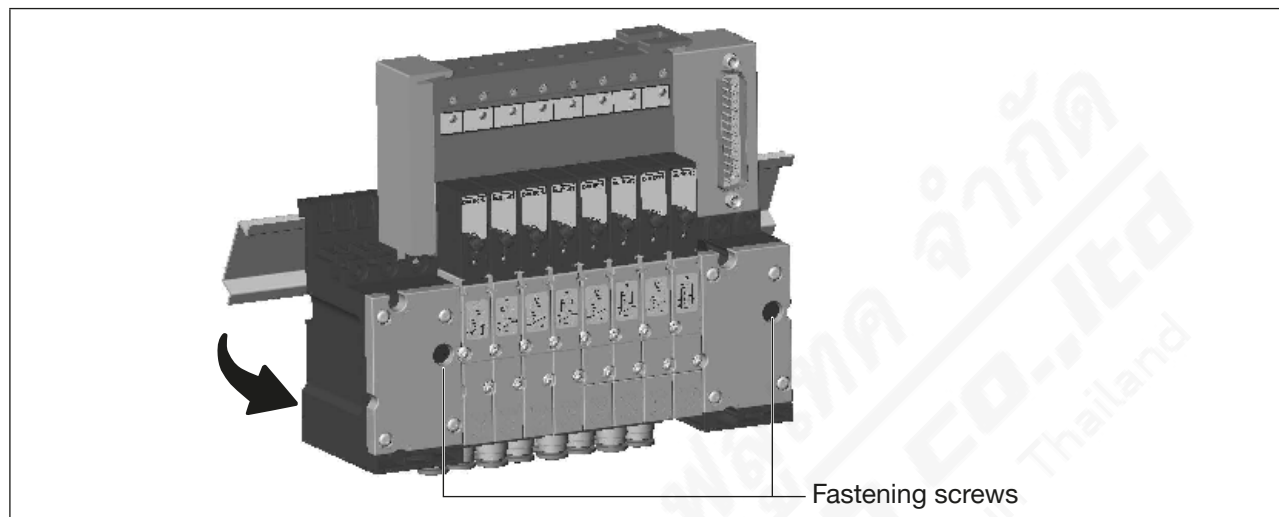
Remove the valve block from the standard rail (displayed as an example with valve island Type 8640)
